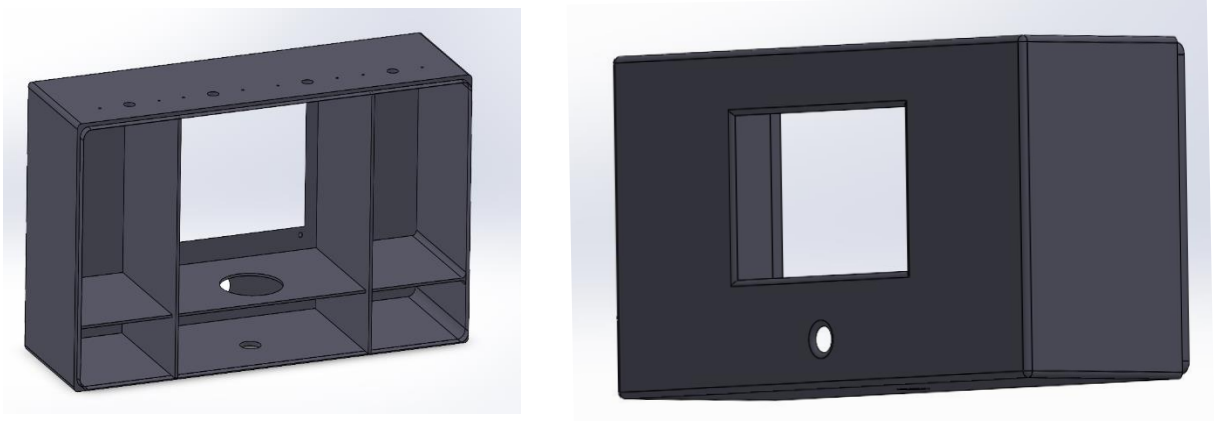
Multiple views of the front housing part to show the details of the part.
